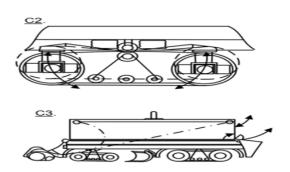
RANGE OF MULTI-JOB MACHINES MACHINES
